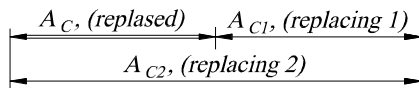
The dimensional chain for resizing in the case of machining a part on the revolving table with external axis
